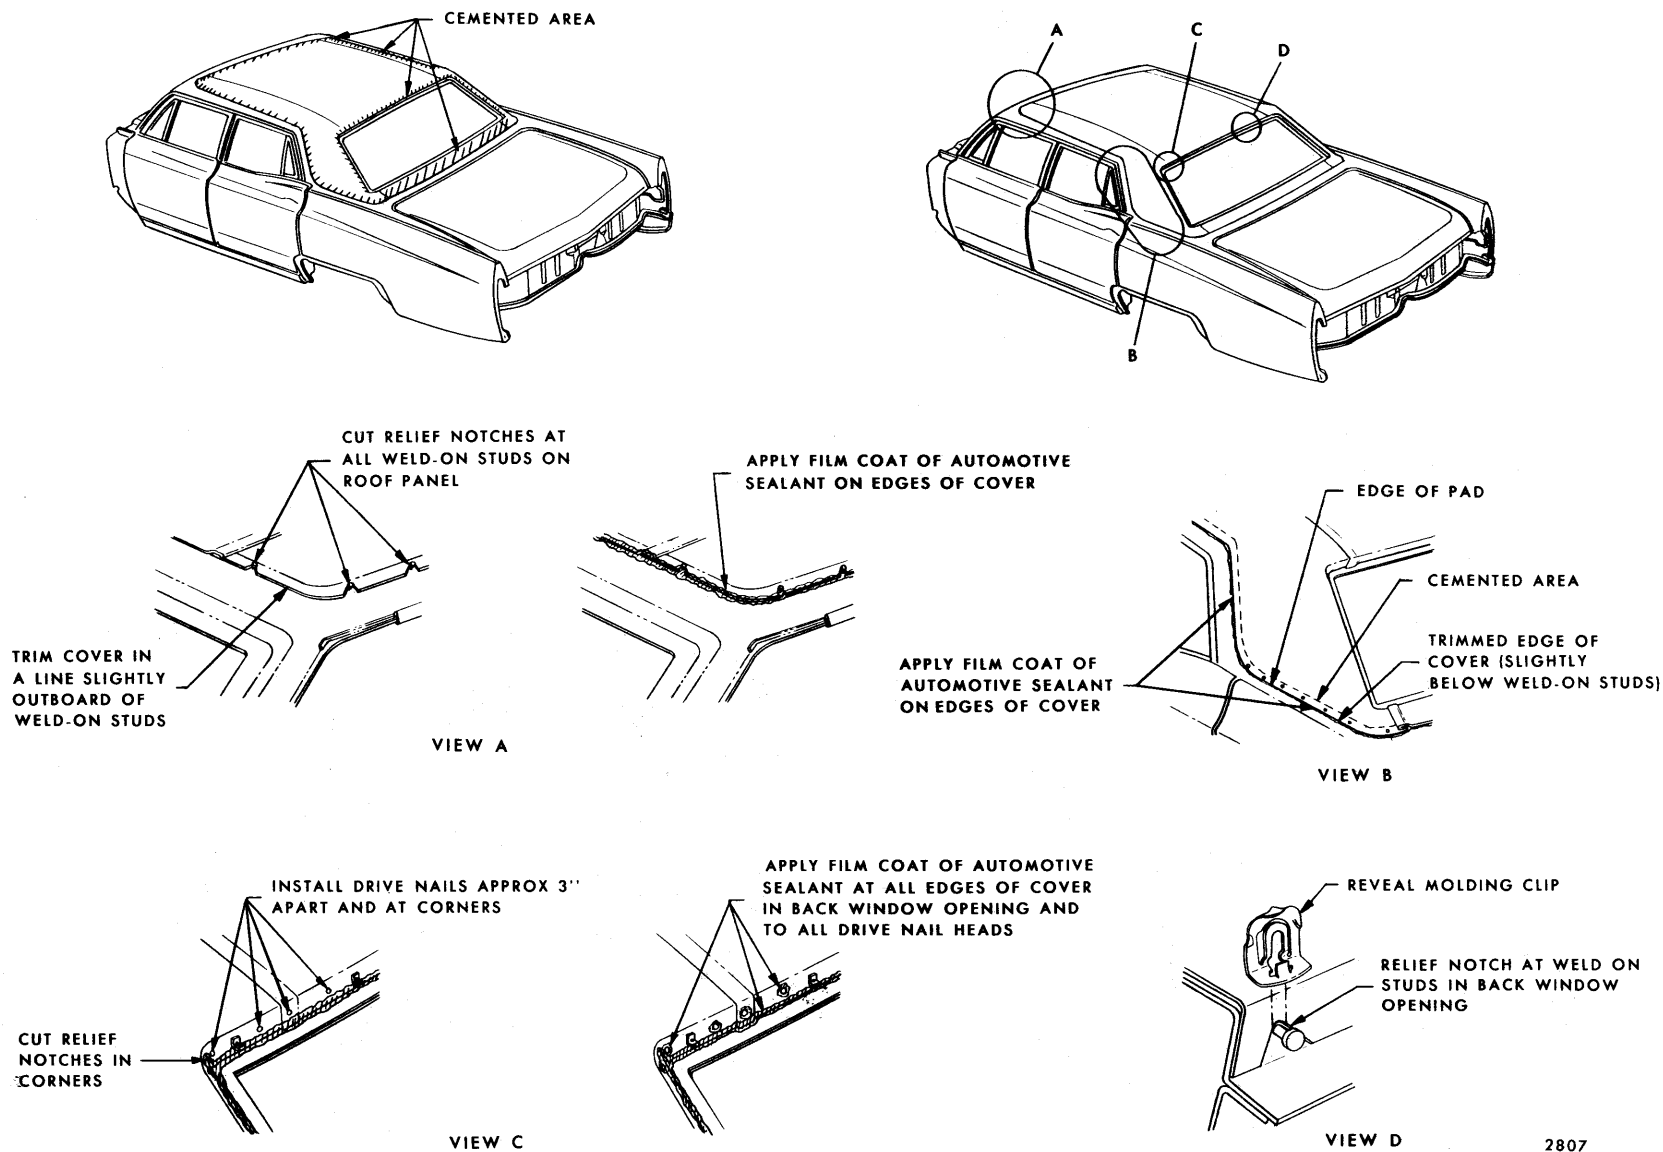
Typical Fabric Roof Cover Installation with Pad
